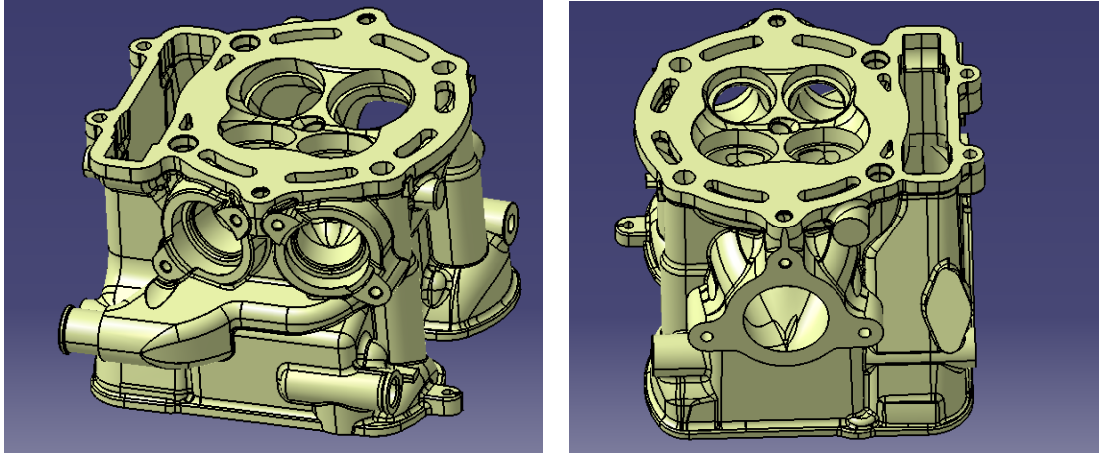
CAD model of the cylinder head. Left: exhaust side Right intake side
